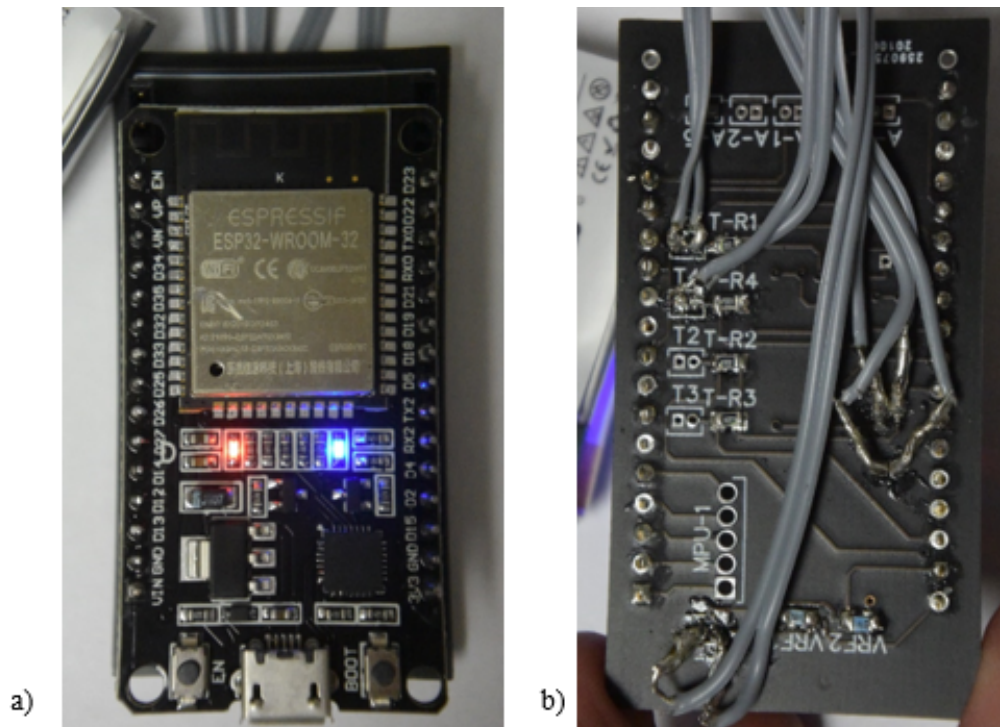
Photograph showing a close-up of the completed PCB from a) front b) rear view
